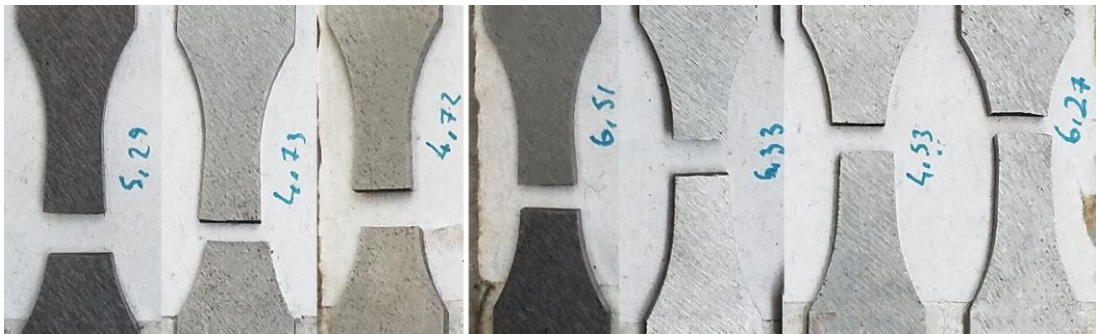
Fracture Surfaces of a LB-250 Fatigue Specimen
